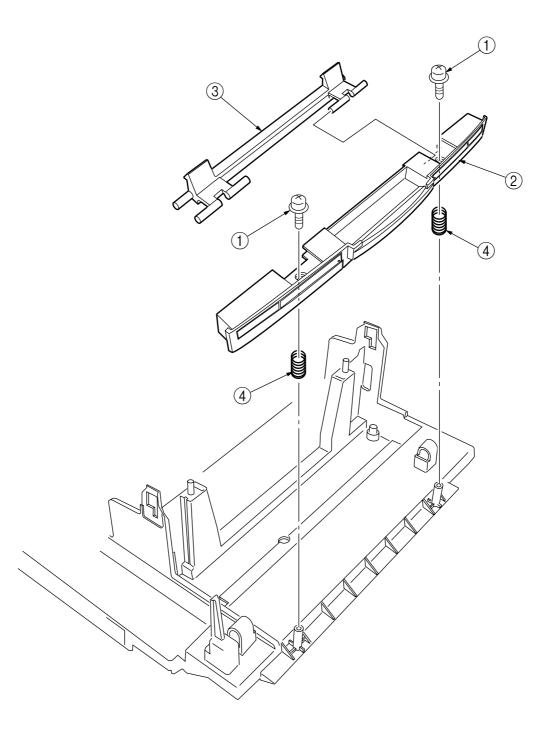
Top Cover Handle/ Tope Cover Latch/ Top Cover Latch Spring
